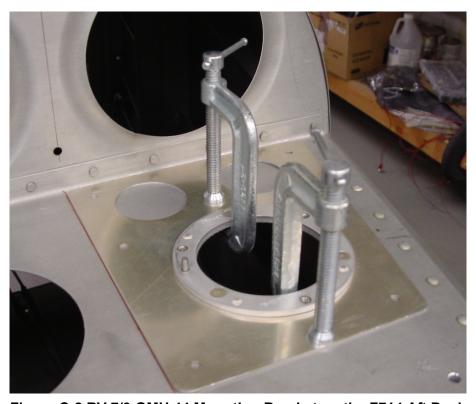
RV-7/9 GMU 44 Mounting Bracket on the F714 Aft Deck
